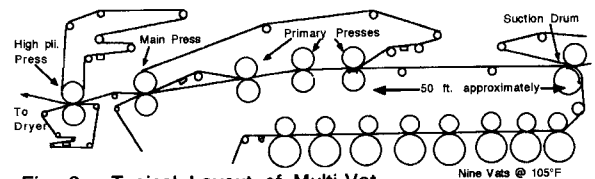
Typical Layout of Multi-Vat Cylinder Board Machine
